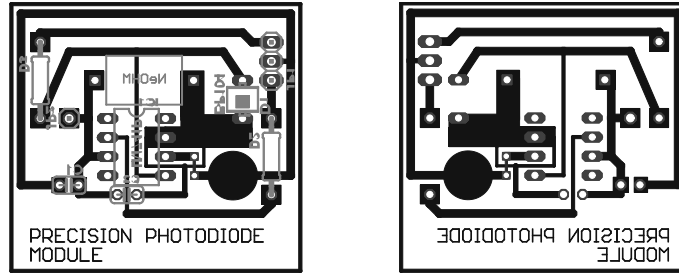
PCB overlay pattern and mirrored etching pattern. Shown to scale.
